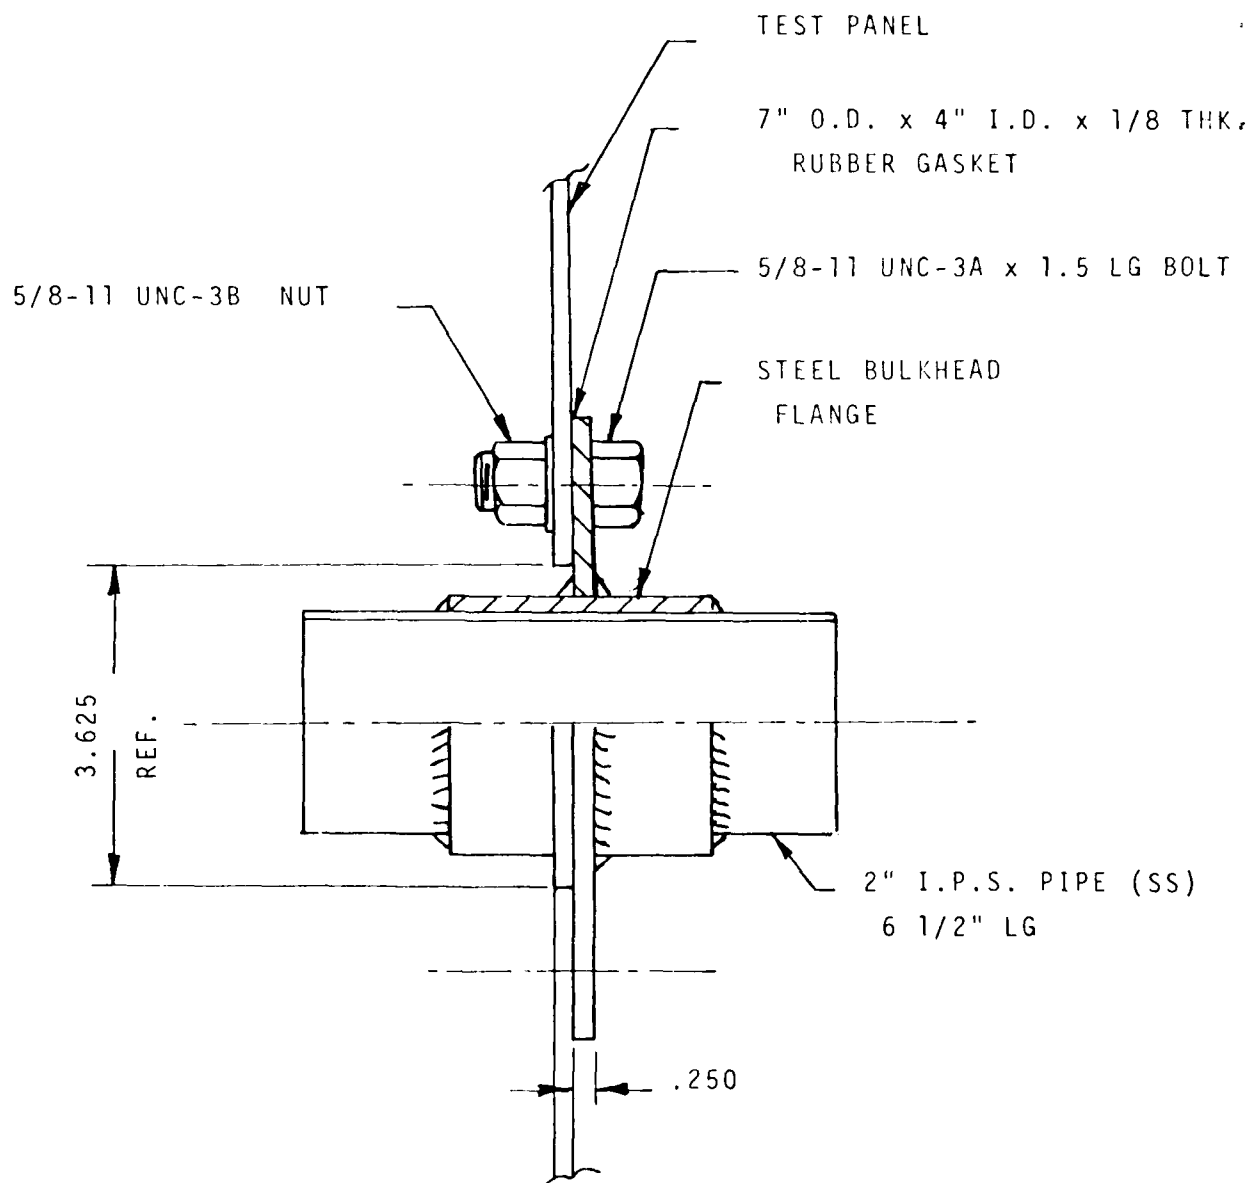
BOLTED FLANGE PENETRATION CONFIGURATION
